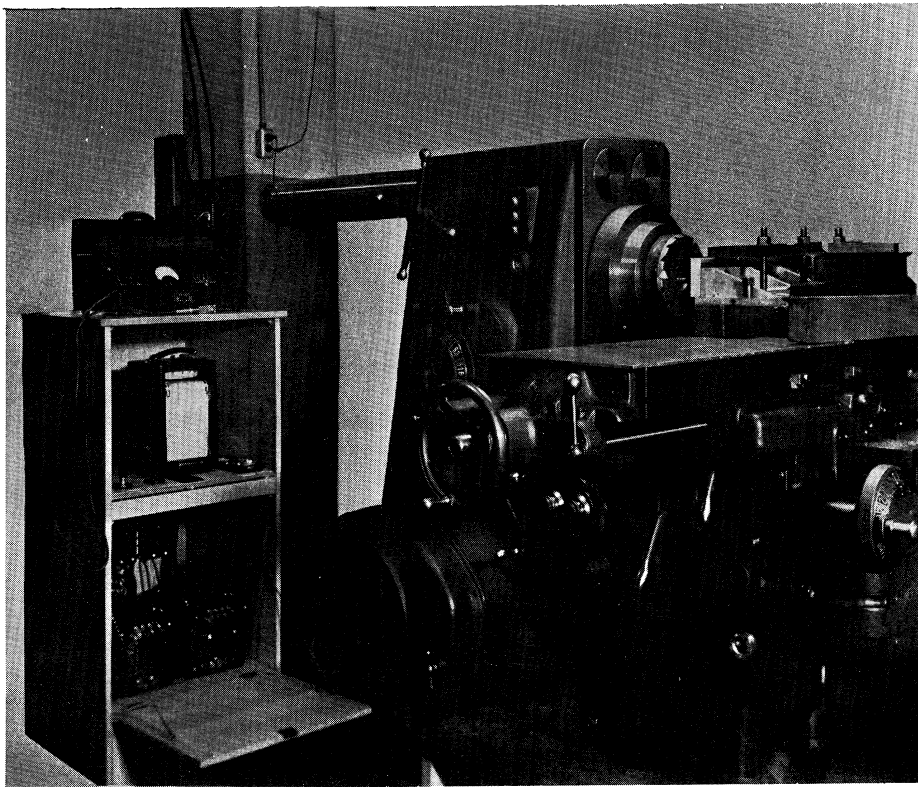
Illustrates a laboratory set-up for studying the effects of flywheels on a milling operation. The flywheel is mounted directly on the end of the milling machine spindle, and a single-toothed face milling cutter is mounted directly upon the flywheel. Additional steel rings made it possible to double and quadruple the inertia of the flywheel shown.
